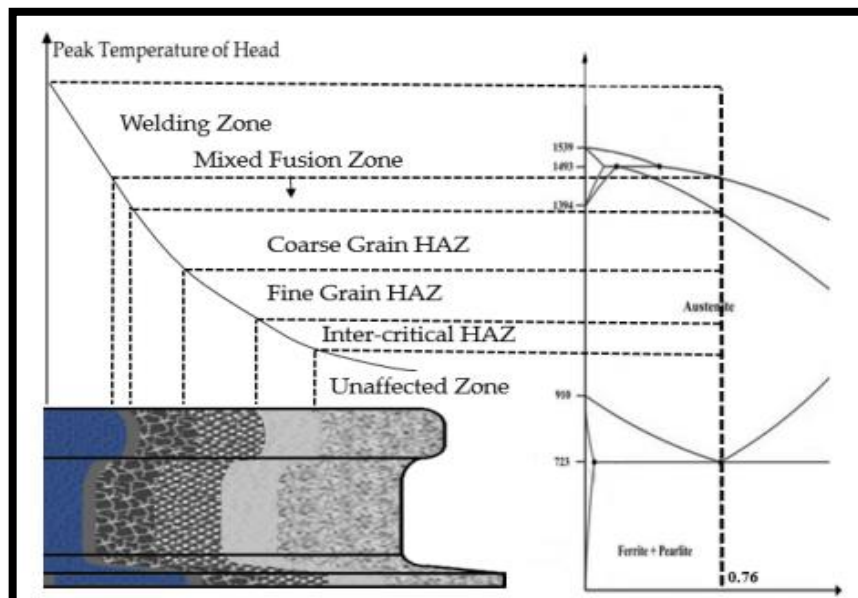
Constituent zones of a fusion welding combined with iron-carbon phase diagram[8].
